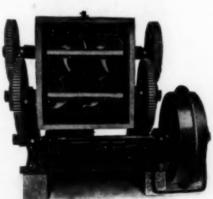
MIXER, WITH POWER TILTING ARRANGEMENT.
